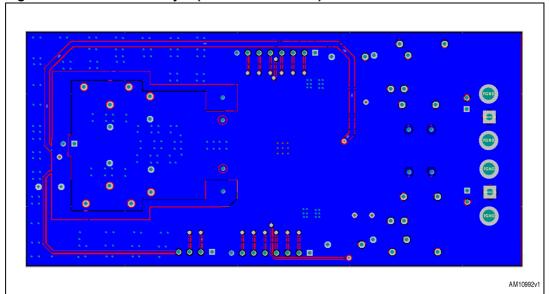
PBC bottom layer (STEVAL-ICB006V1)
